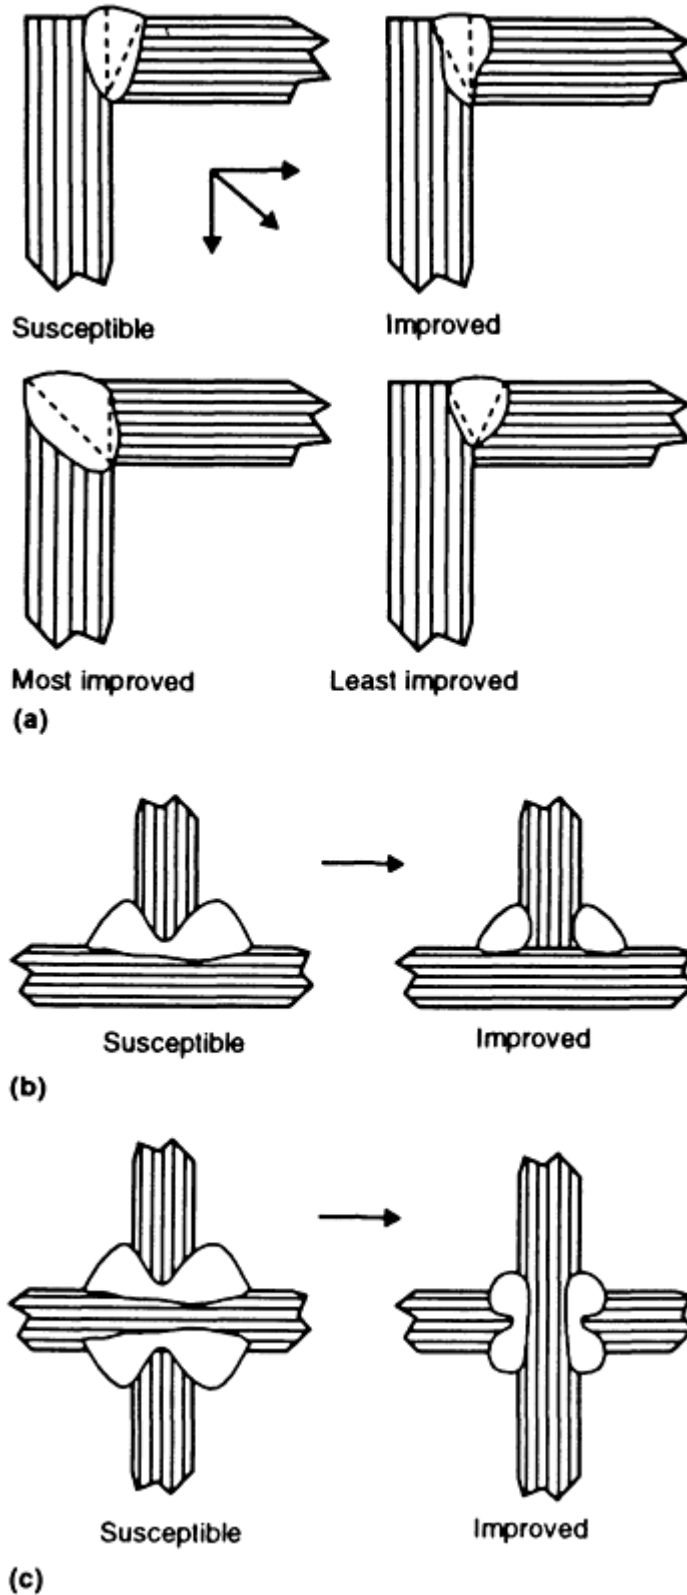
METHODS USED TO REDUCE LAMELLAR TEARING. (A) ANGLING THE WELD FUSION LINE TO AVOID SHRINKAGE STRESSES IN THE THROUGH-THICKNESS DIRECTION. (B) USE OF SMALLER PARTIAL-PENETRATION WELDS TO REDUCE JOINT RESTRAINT. (C) PLACEMENT OF WELDING BEADS ON THE THINNER PLATE (WHEN WELDING PLATES OF DIFFERENT THICKNESSES) SO THAT SMALLER BEADS CAN BE USED. SOURCE: REF 4
